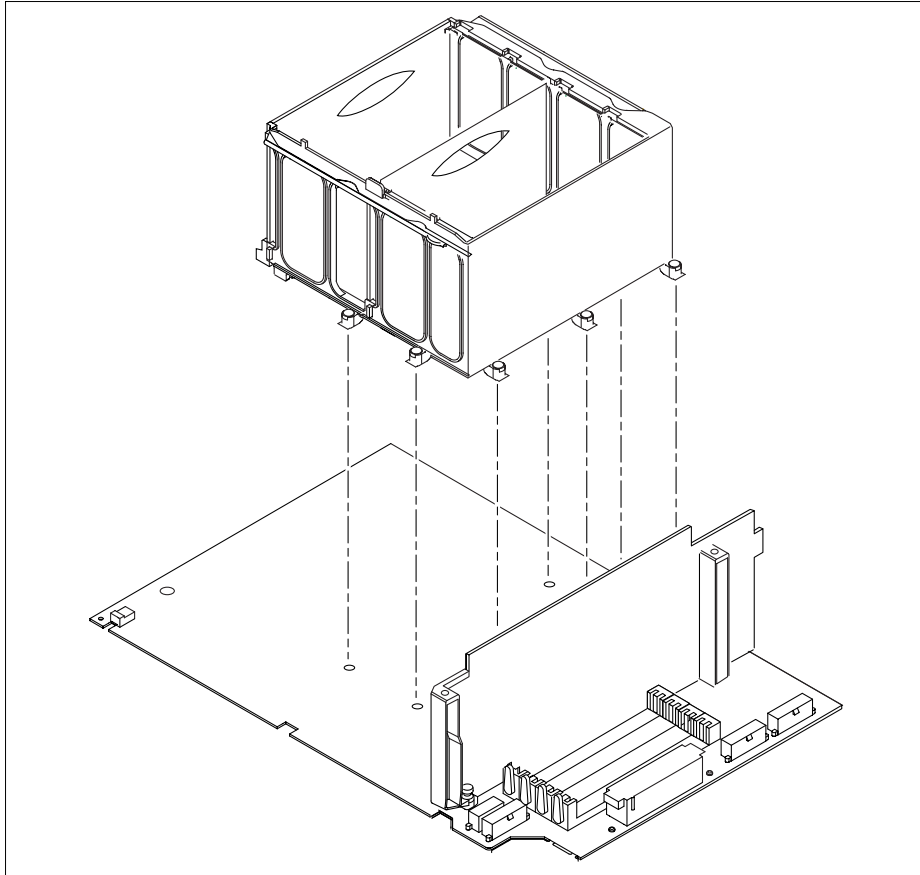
Removing and Replacing the CPU Shroud Assembly
